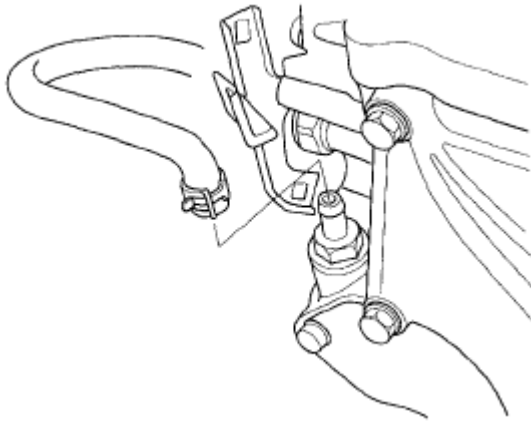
Identifying Positive Crankcase Ventilation (PCV) Hose
